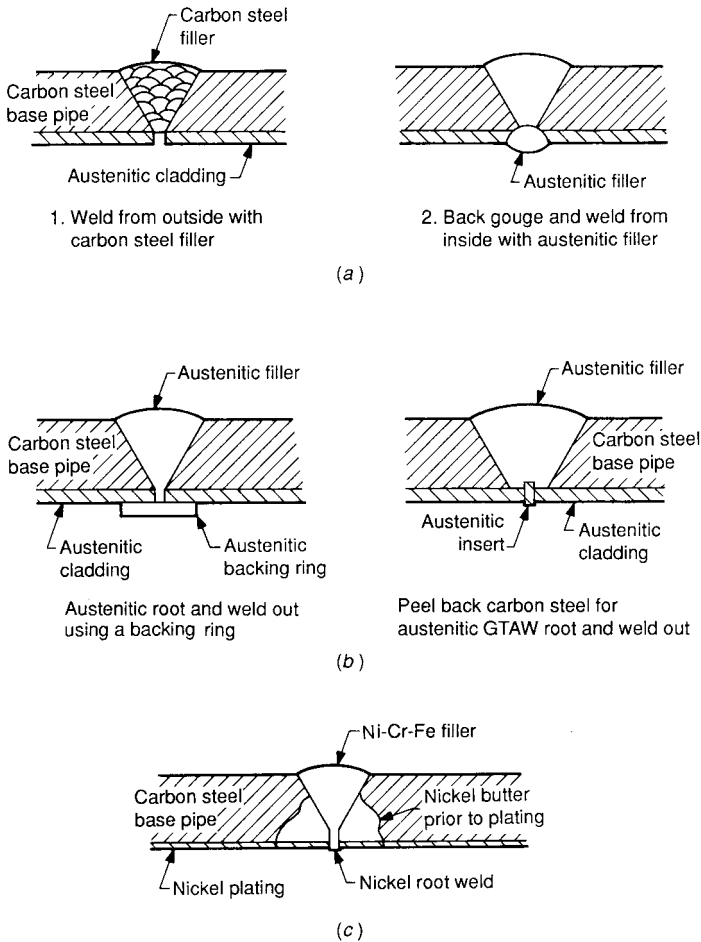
Examples of welding clad, lined, and plated pipe. (a) Clad pipe welded from both sides; (b) clad pipe welded from one side only; (c) nickel-plated pipe.
